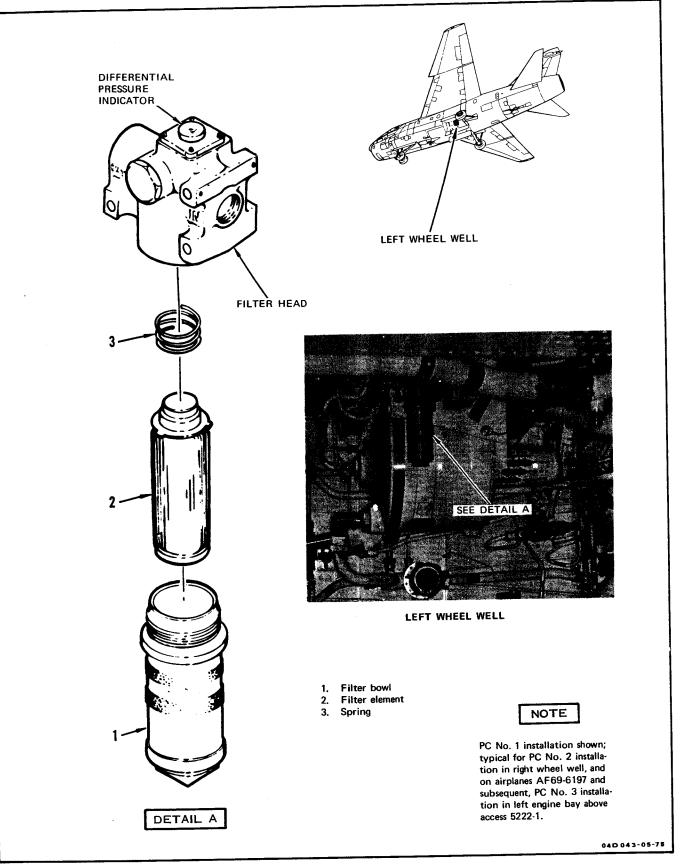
Filler and Pump Cooling Line Filter Element Removal and Installation
